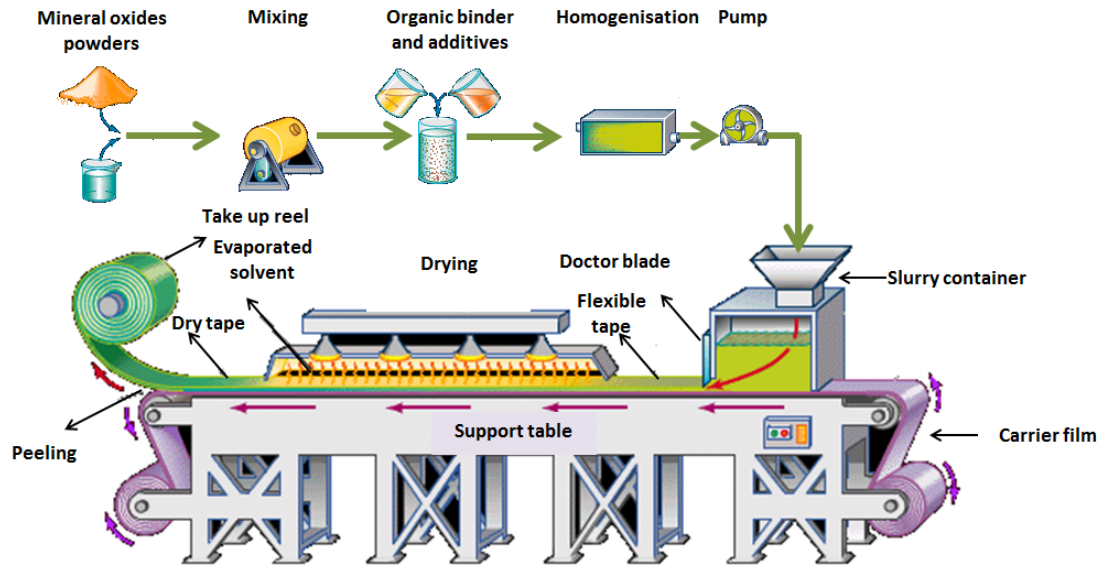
Ceramic preparation technique: tape casting (reproduced from [18])
